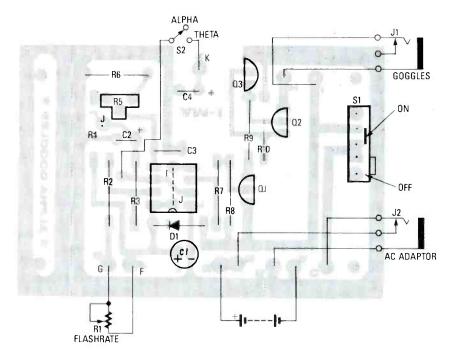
THE PARTS PLACEMENT for the A/MG PC-board shows switch S1 soldered directly on the board. Notice transistor orientation, and the polarity of capacitors and diode D1.
